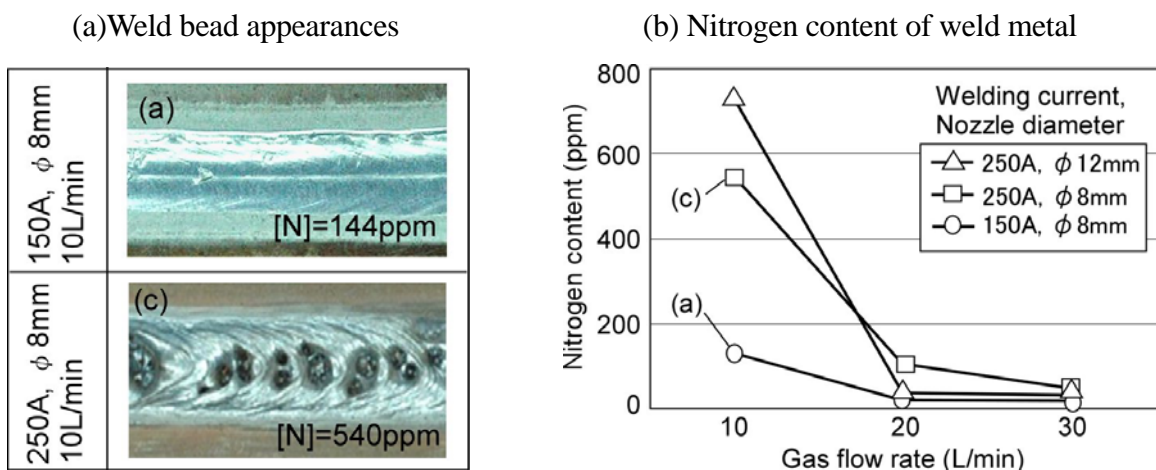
Influences of welding current and shielding nozzle diameter on nitrogen content of weld
